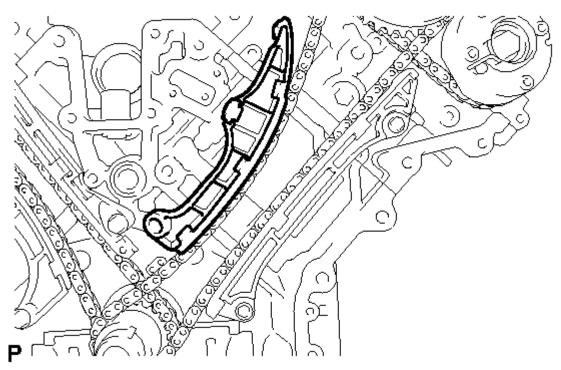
Identifying No. 1 Chain Tensioner Assembly LH & Bolts
